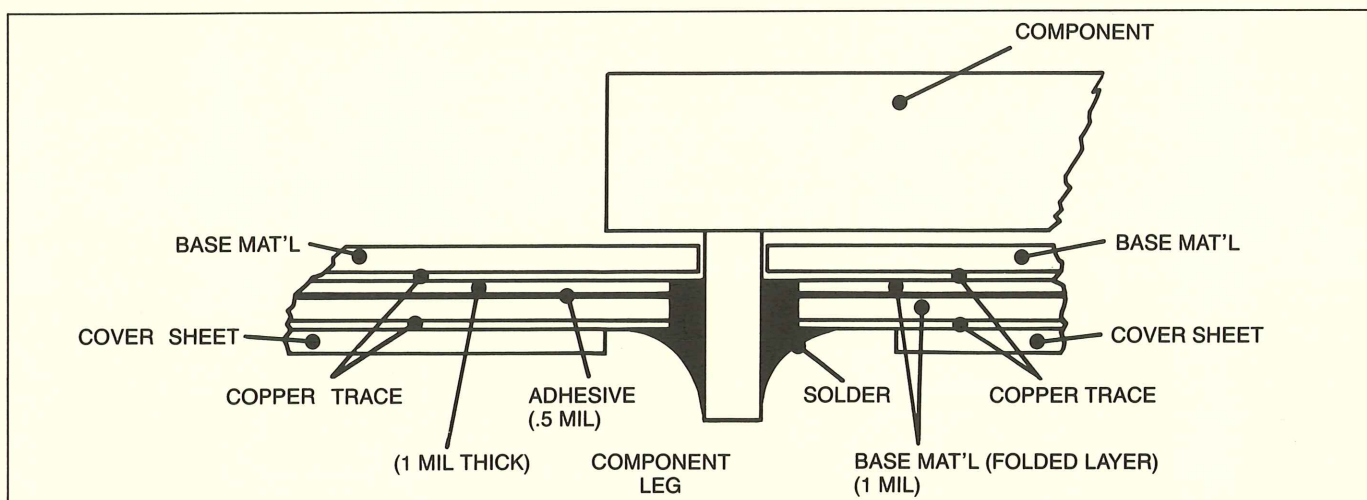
When folded, a single-sided flex circuit can approach double-sided performance. When holes are lined up using jigs, both layers can be simultaneously soldered.
